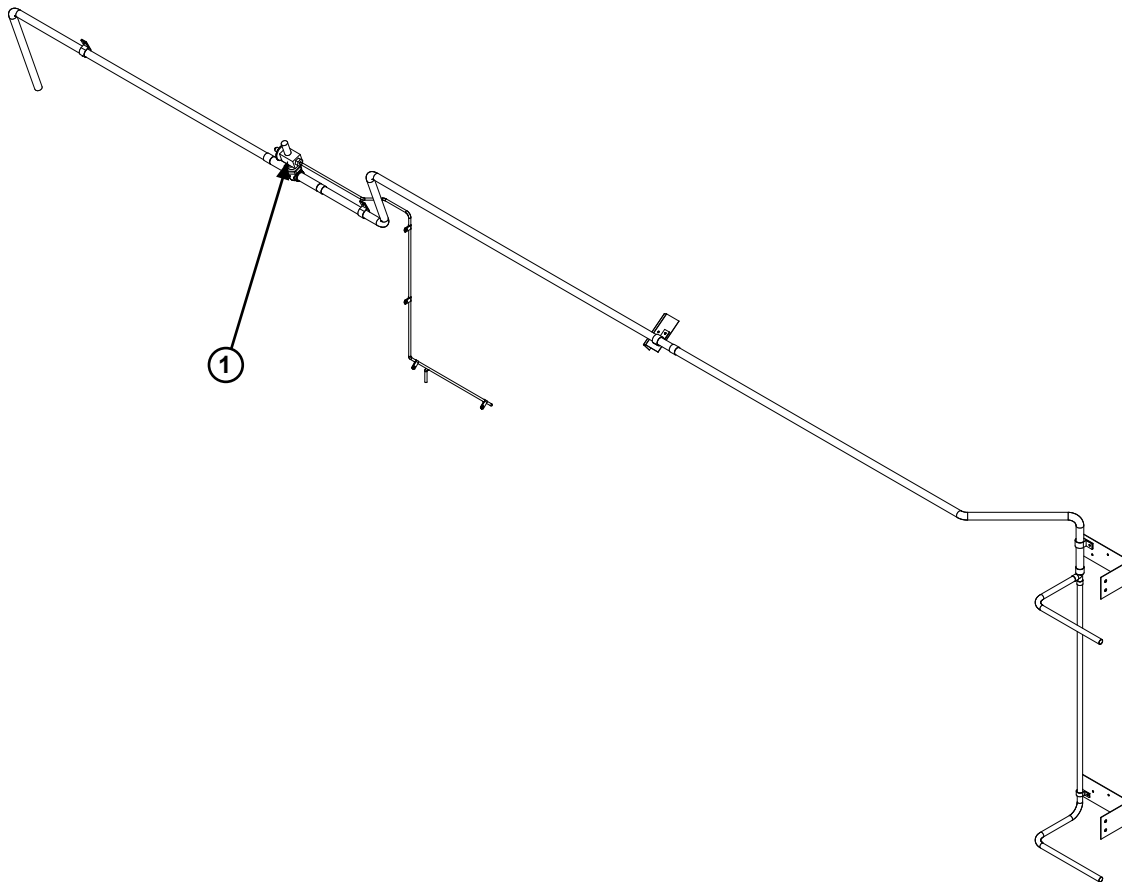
REFRIGERANT PIPING ASSEMBLIES
